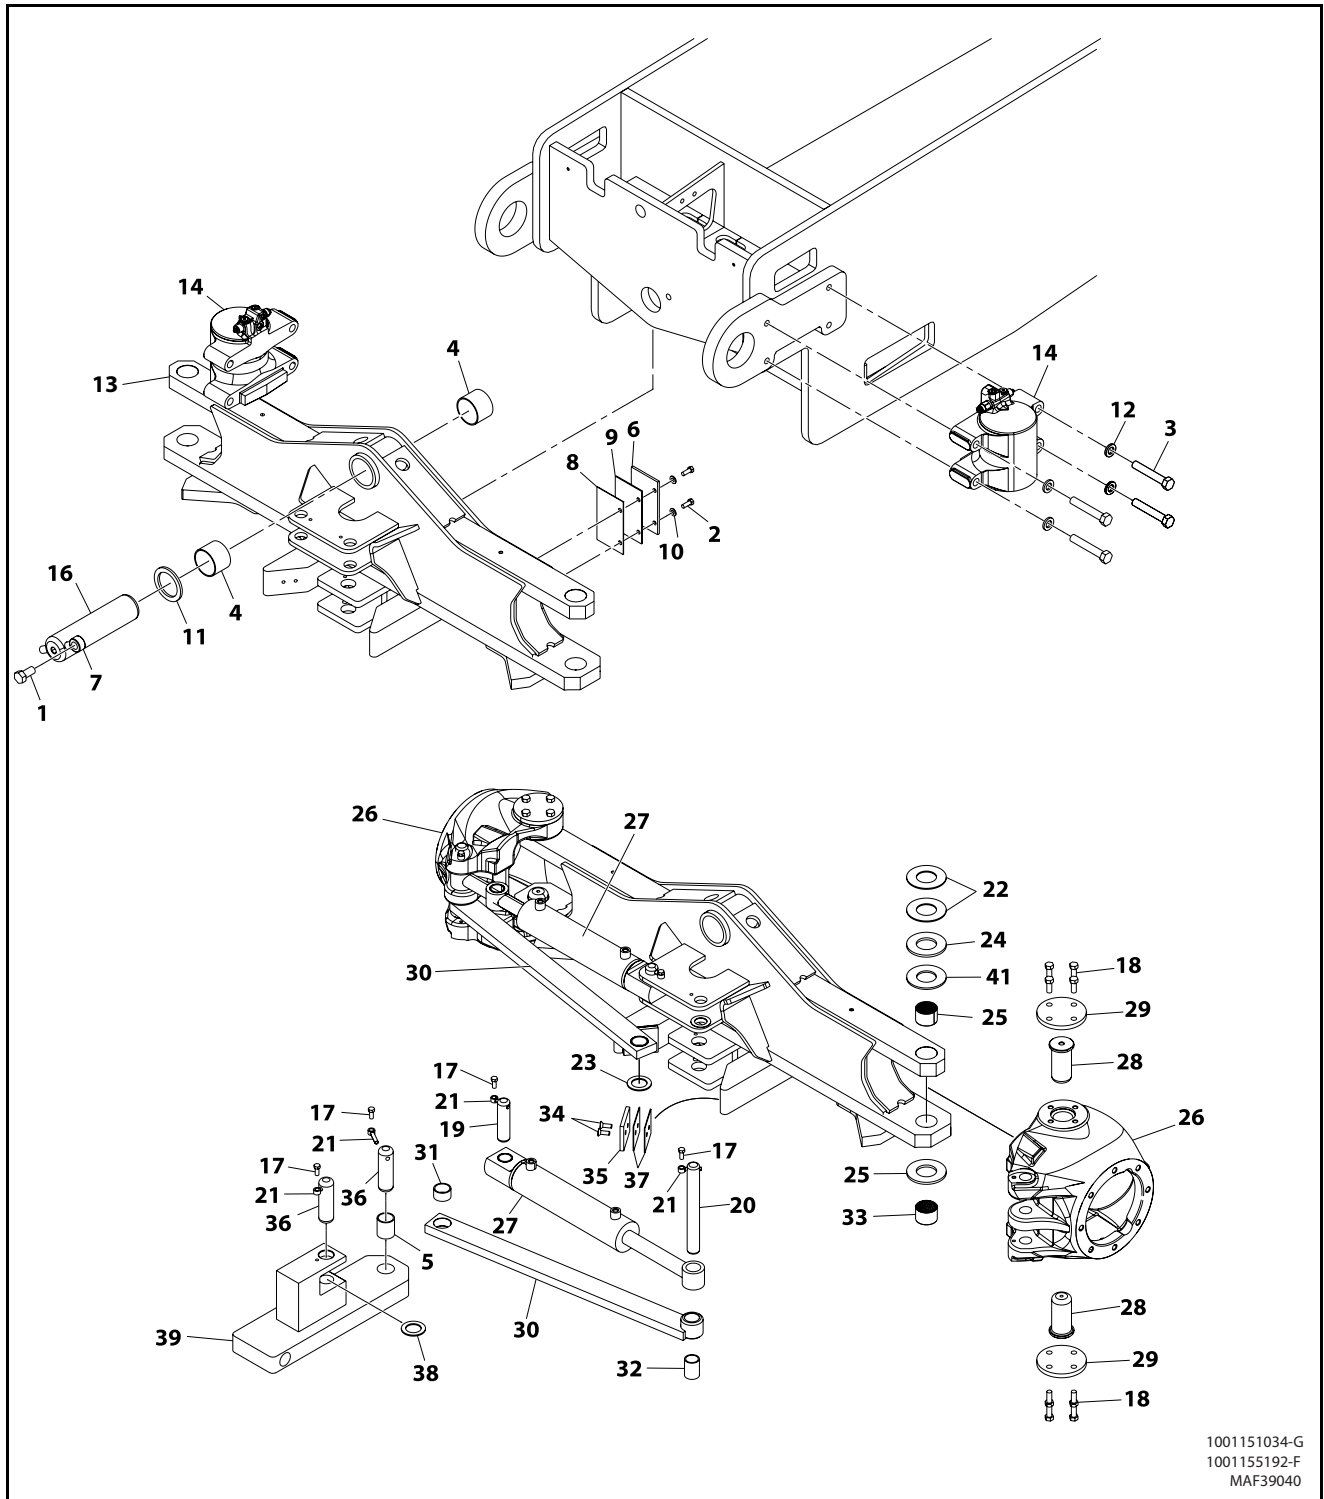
Axle and Steering Installation without Tow Package- Sheet 1 of 2
